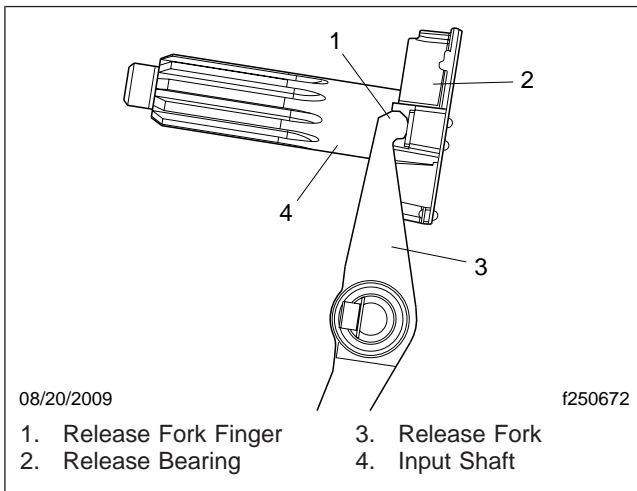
, Input Shaft, Release Bearing, and Release Fork
